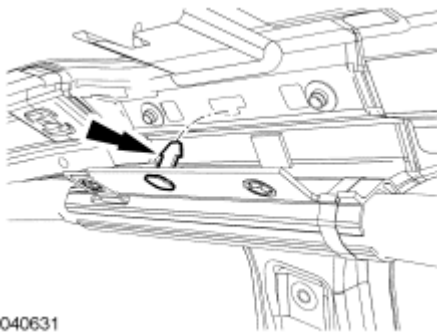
Locating Side Air Curtain Module Center Guide Hook Retainer
